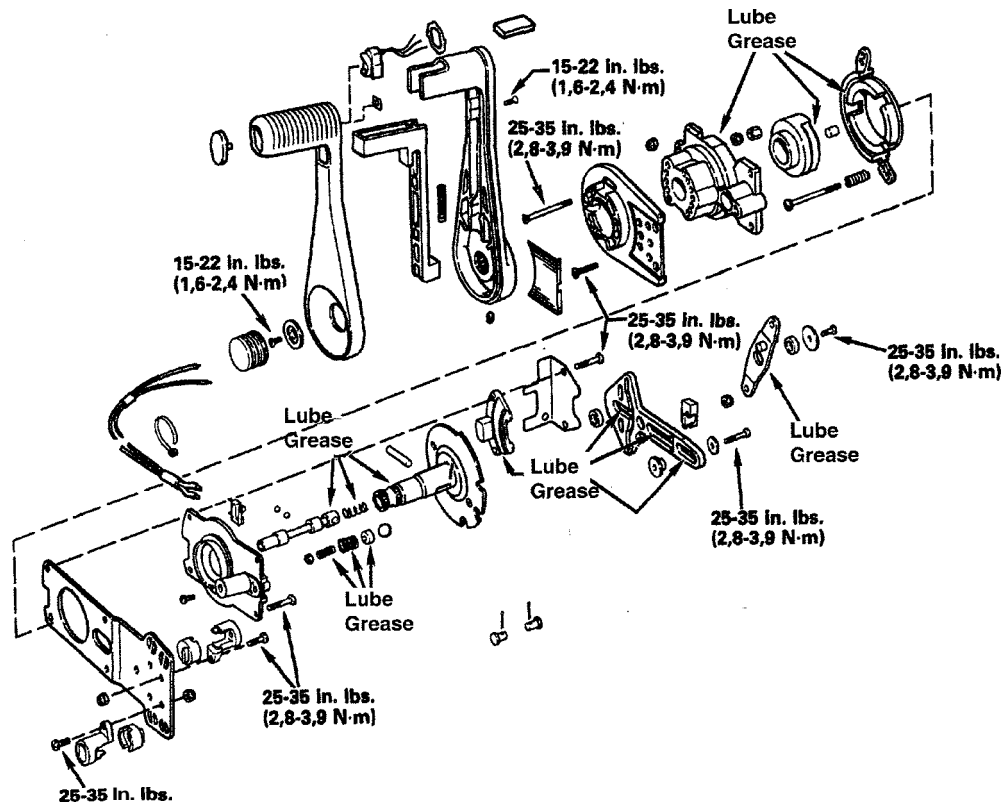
For safety, pay close attention to component bolt torque and lubrication during assembly-concealed side mount remote
